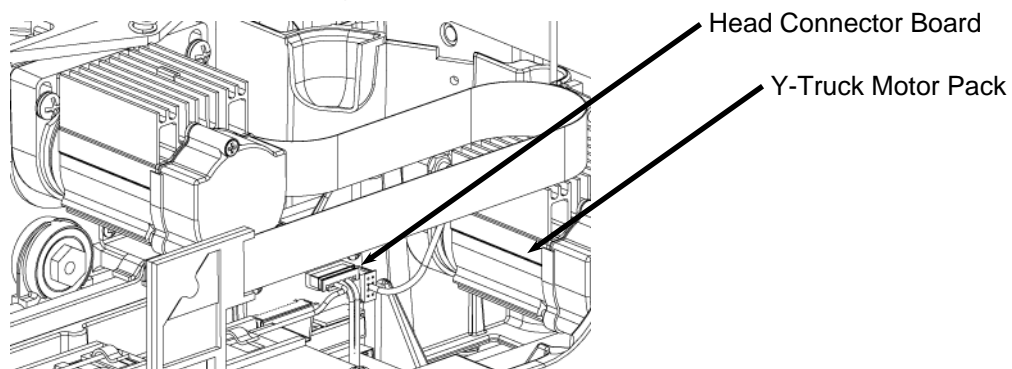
LOCATING THE HEAD CONNECTOR BOARD
